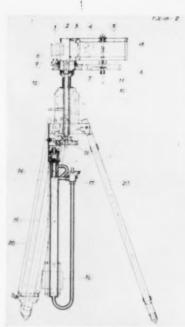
This scale drawing illustrates the camera and camera drive assembly mounted on the tripod.
